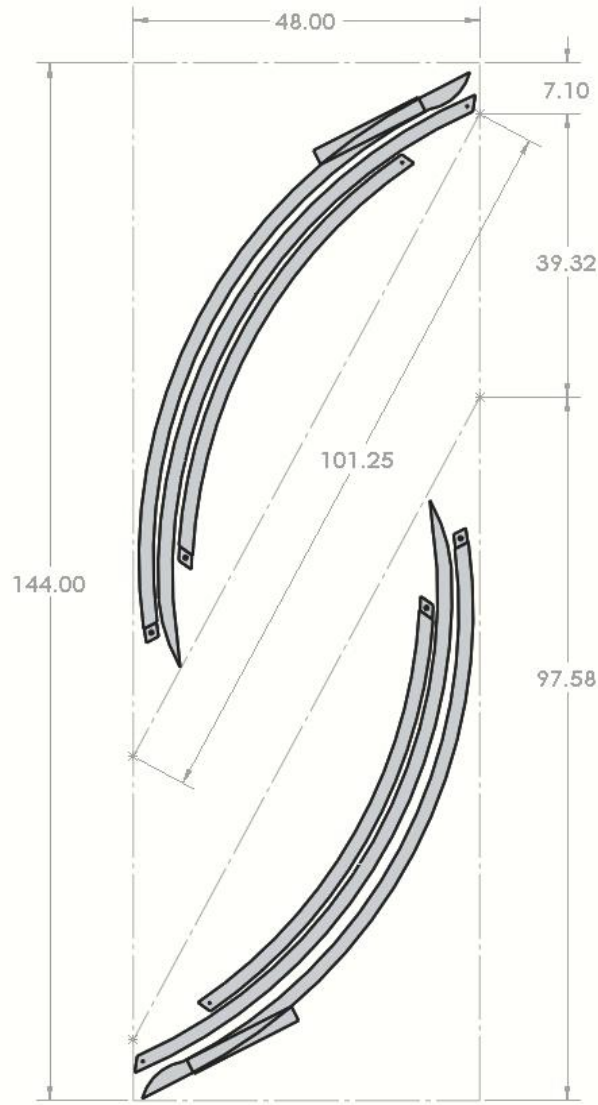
4 x 12 foot aluminum sheet used for cutting arch sections. Dimensions are in inches
